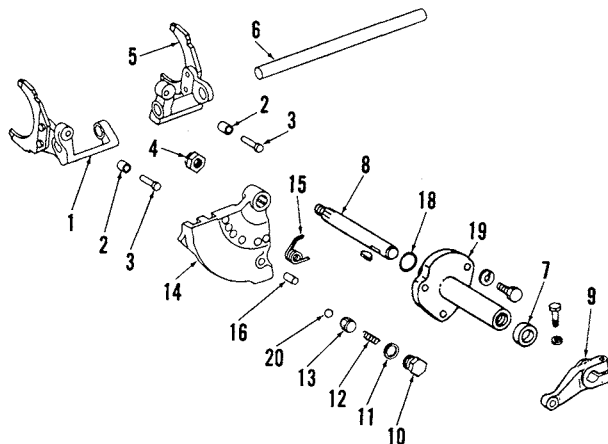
Exploded view of speed change shifters and components used on Models 4050, 4250 and 4450 with Quad-Range transmission. Refer to Fig. 123A for similar parts for 4650 models.
